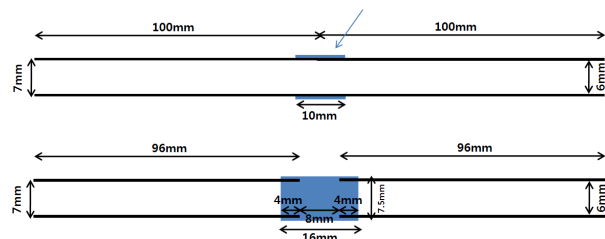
A schematic design for welding two FMS tubes is shown on top. A schematic design for welding FMS tube and ODS plug is shown on bottom.
